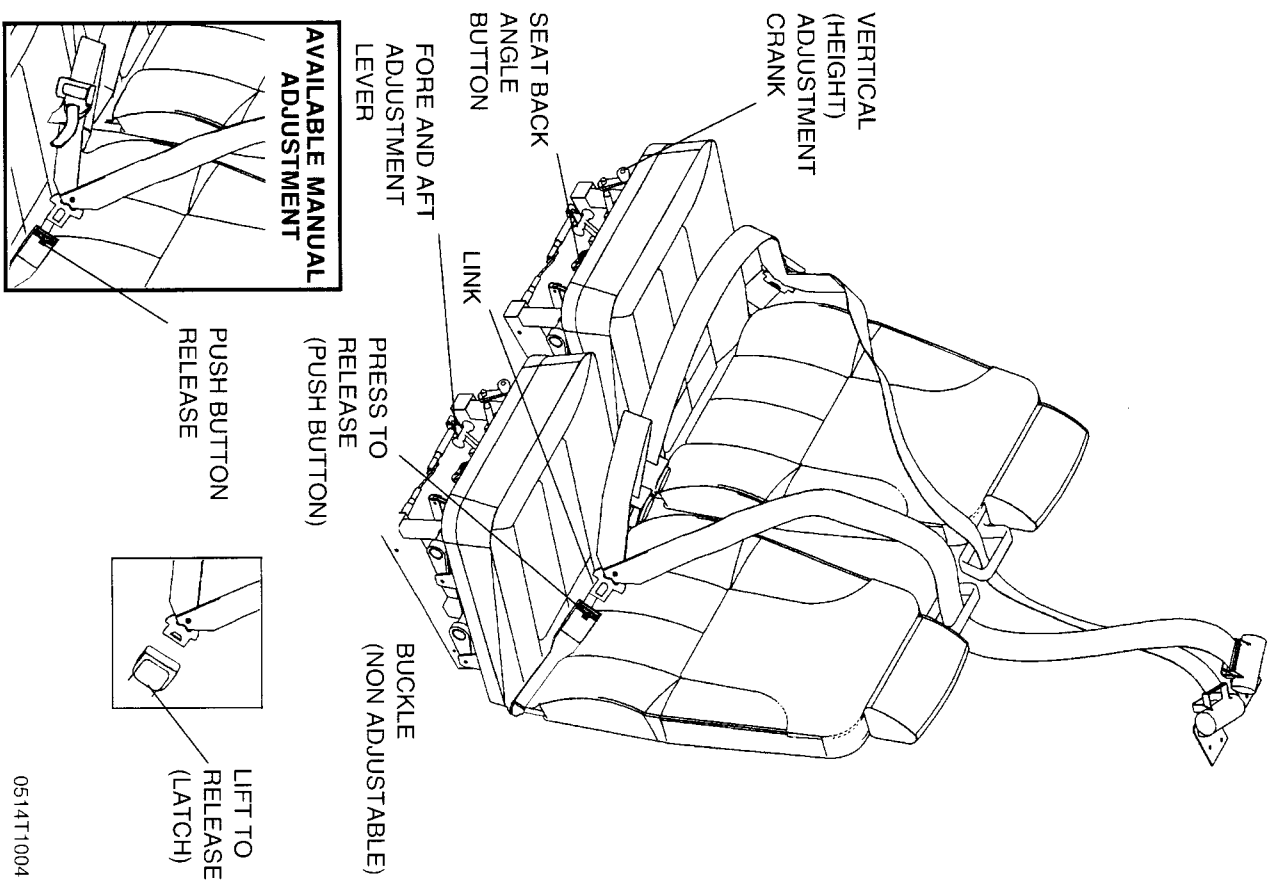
Crew Seats, Seat Belts and Shoulder Harnesses
